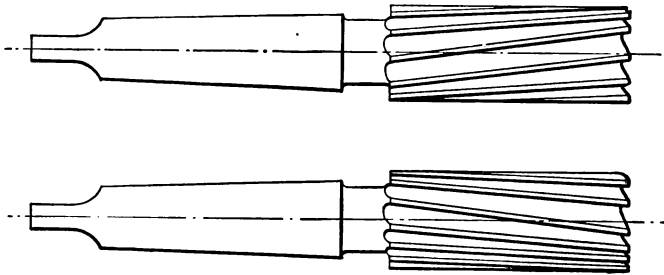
Right- and Left-hand Spiral Cut End Mills.
